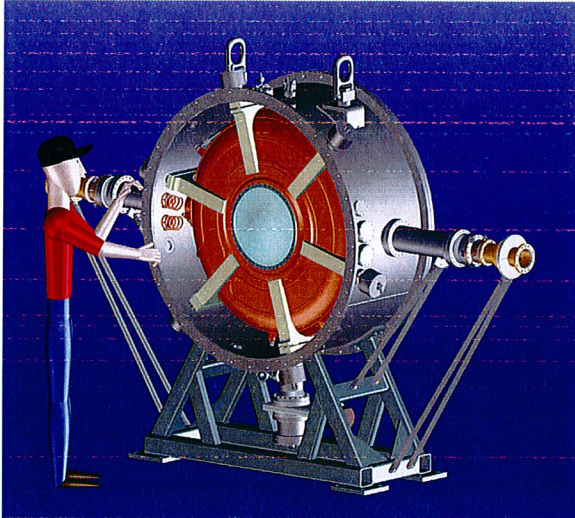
3D model of the single cavity vacuum vessel with the front cover removed.
